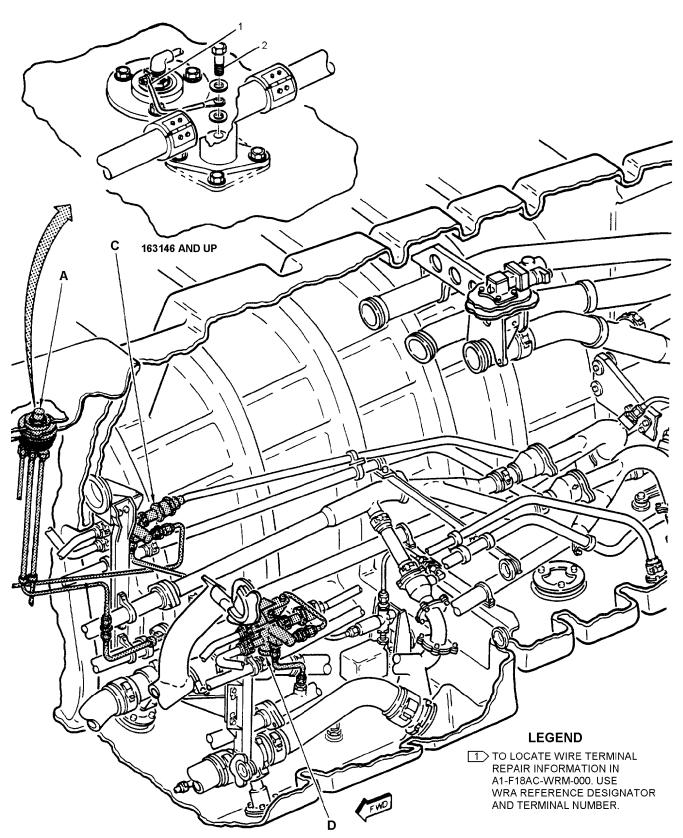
Fuel Diverter Valve (5L-P119 or 5L-R118) (Sheet 1)
